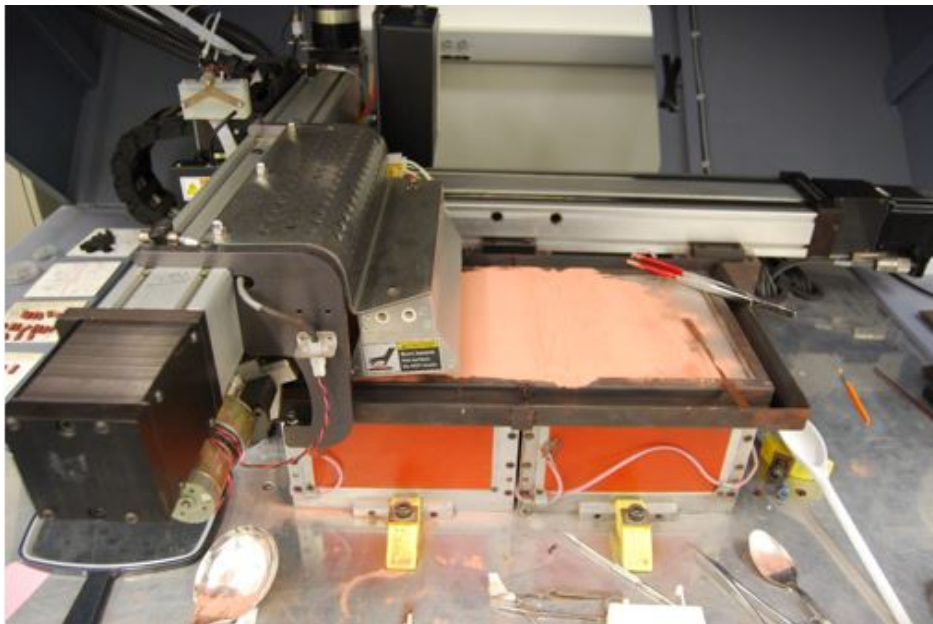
A photo of the printer, build tray, binder print head, and powder spreader.
